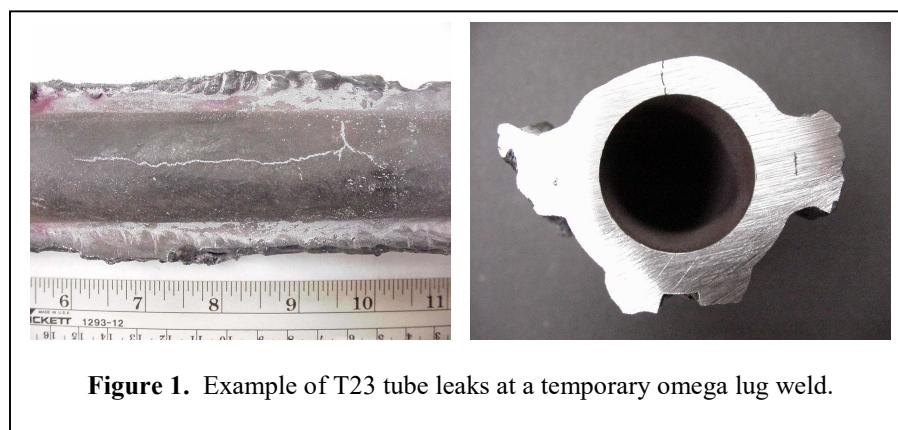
Example of T23 tube leaks at a temporary omega lug weld.
